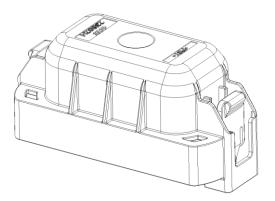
2319021-1 Cover, 8P Mini Fuse Housing Assembly
